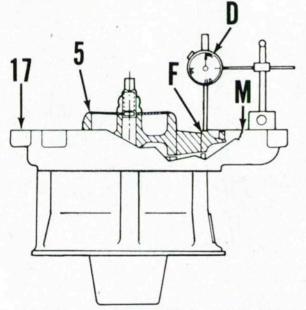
View showing dial indicator placement to determine fan wheel shim thickness. Refer to text.
